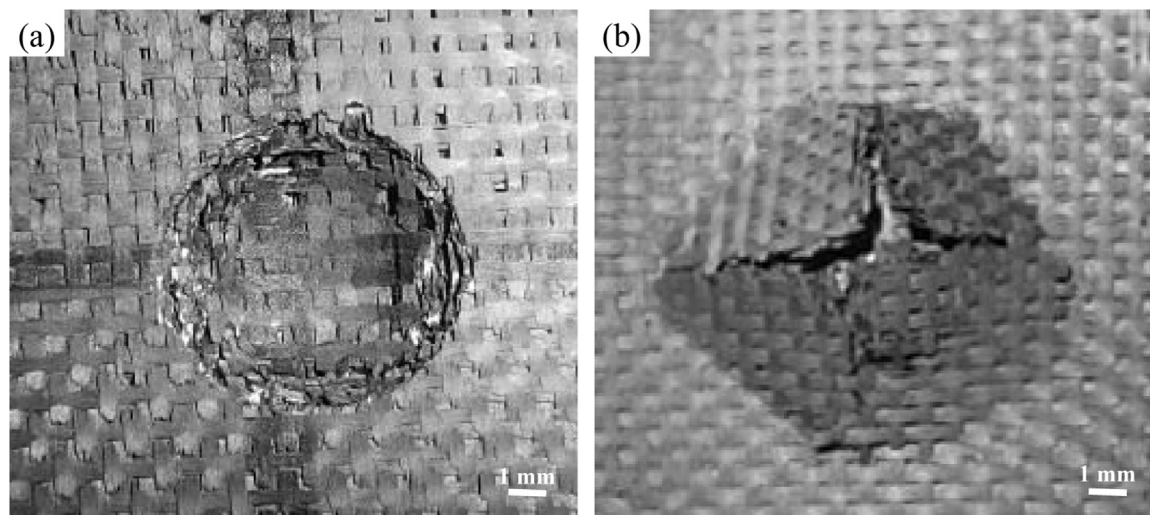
Photographs of impact damage to the C/SiCs specimens under $E_i=6$ J showing (a) front side and (b) back side.
